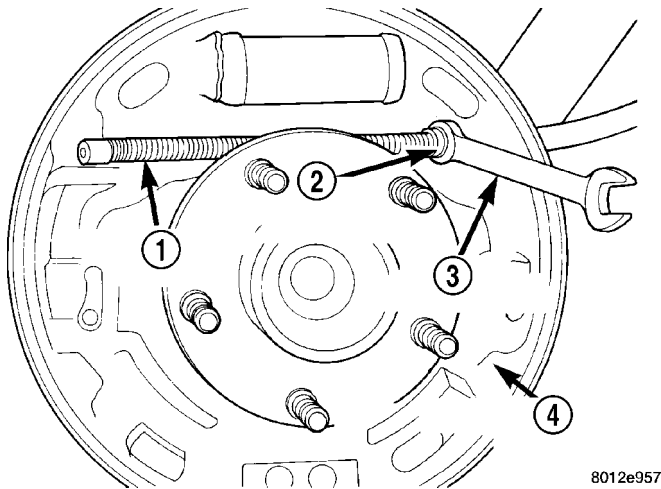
Removing Park Brake Cable From Brake Support Plate
